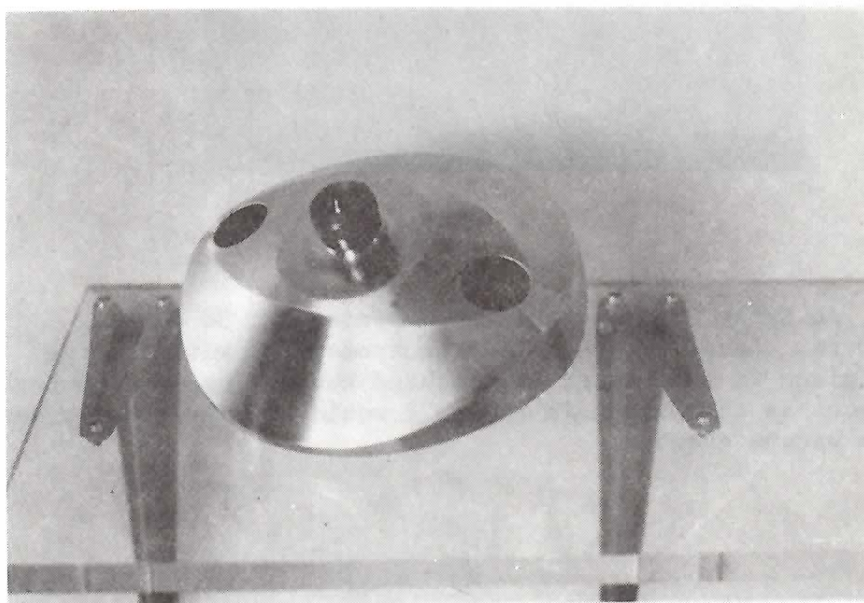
An Ultra-centrifuge Rotor - Diameter ~ 20 cm and height ~ 10 cm. Holes are for holding a sample vial and counterweight. Rotor is ~ 5 kg.
